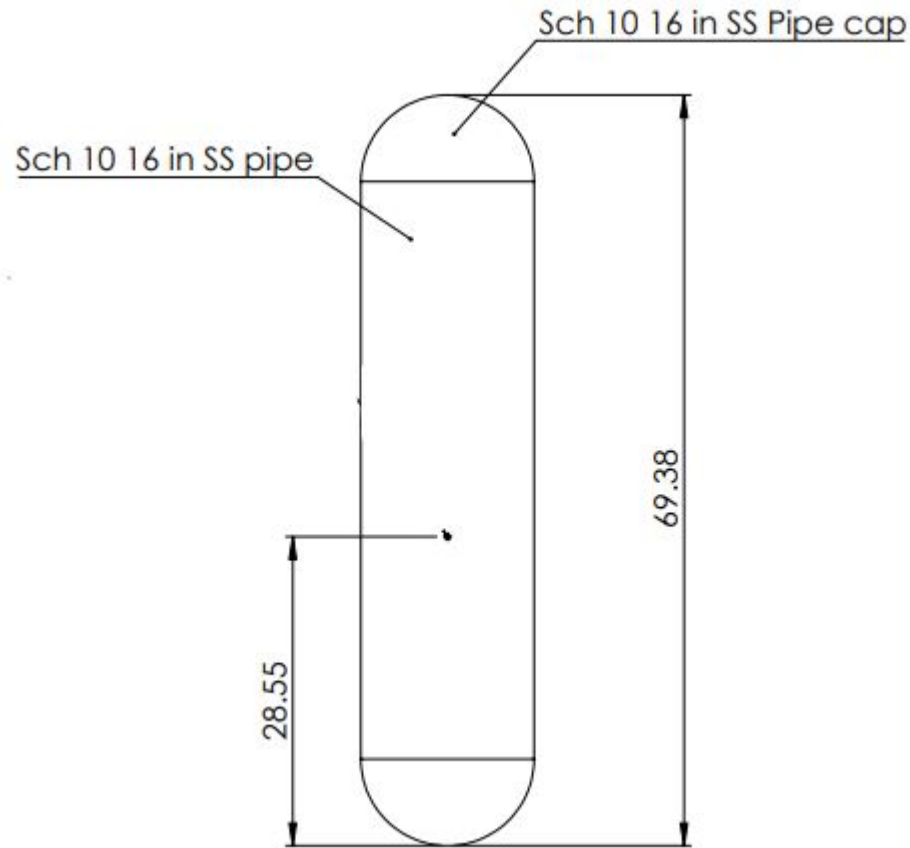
The scaled power generation vessel (PGV) showing the drilled-through hole.
